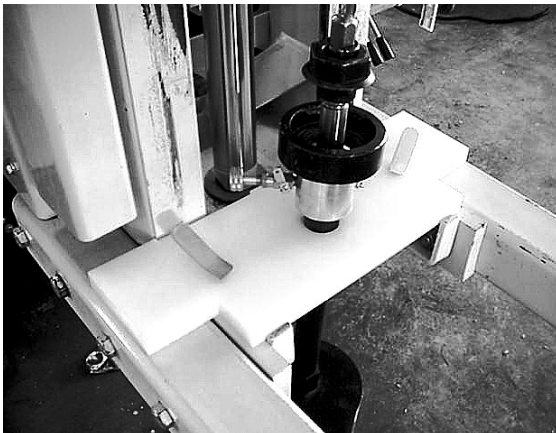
Position support plate with end cutouts facing the operator on 6600-Series units.
